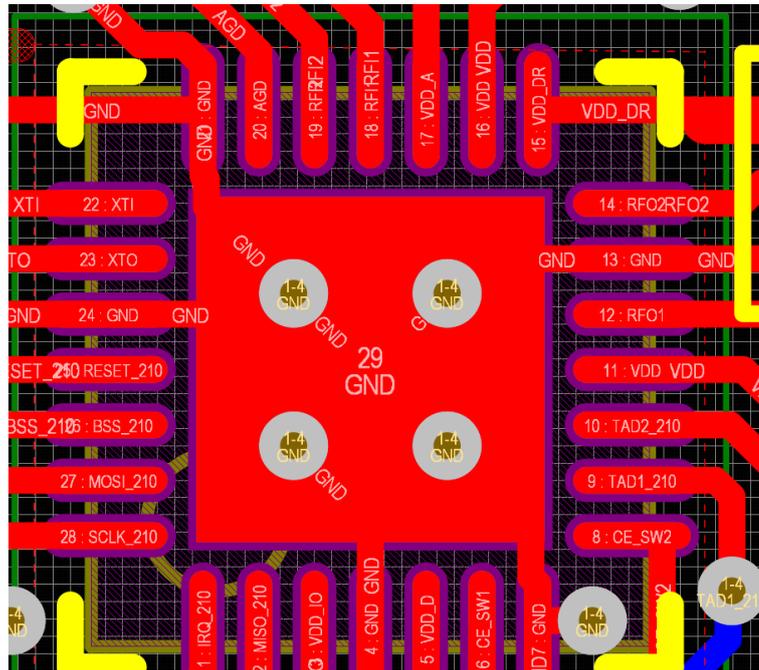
Exposed pad top view and recommended QFN28 GND layout
